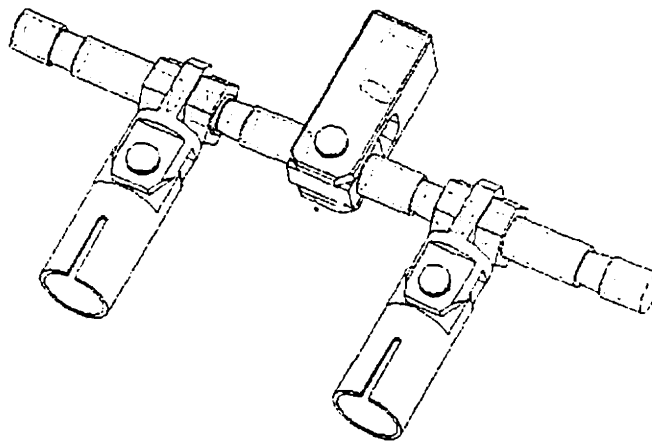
Aerobar Bar-end Test Attachment Assembly
